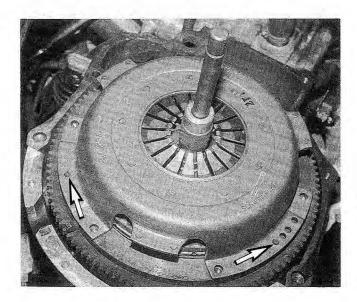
Pressure plate guide pins (arrows). Note use of pilot tool to align clutch disc.
